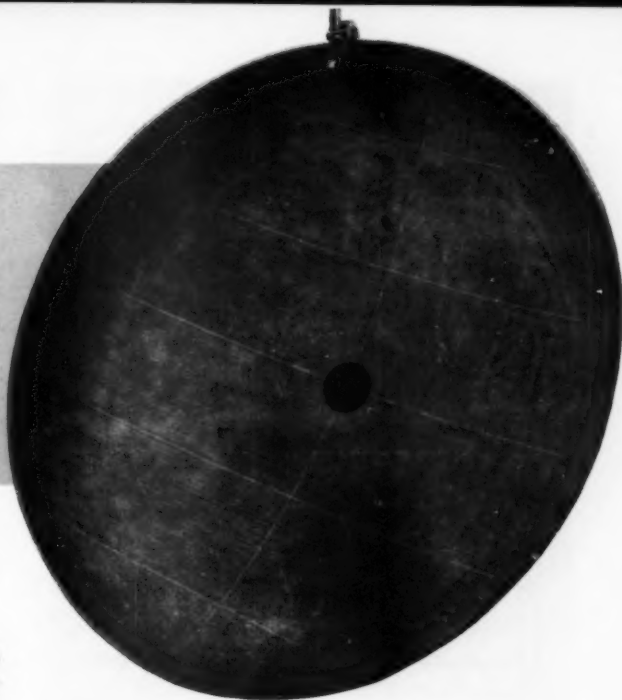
Above—Dished head formed out of seam welded applied liner plate.
